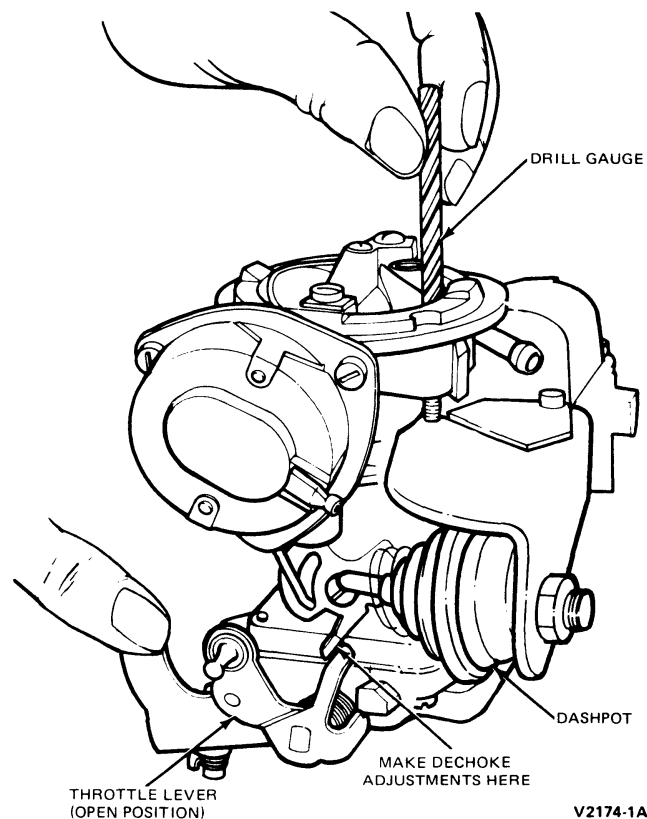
Choke Plate Clearance Adjustment (Dechoke)
